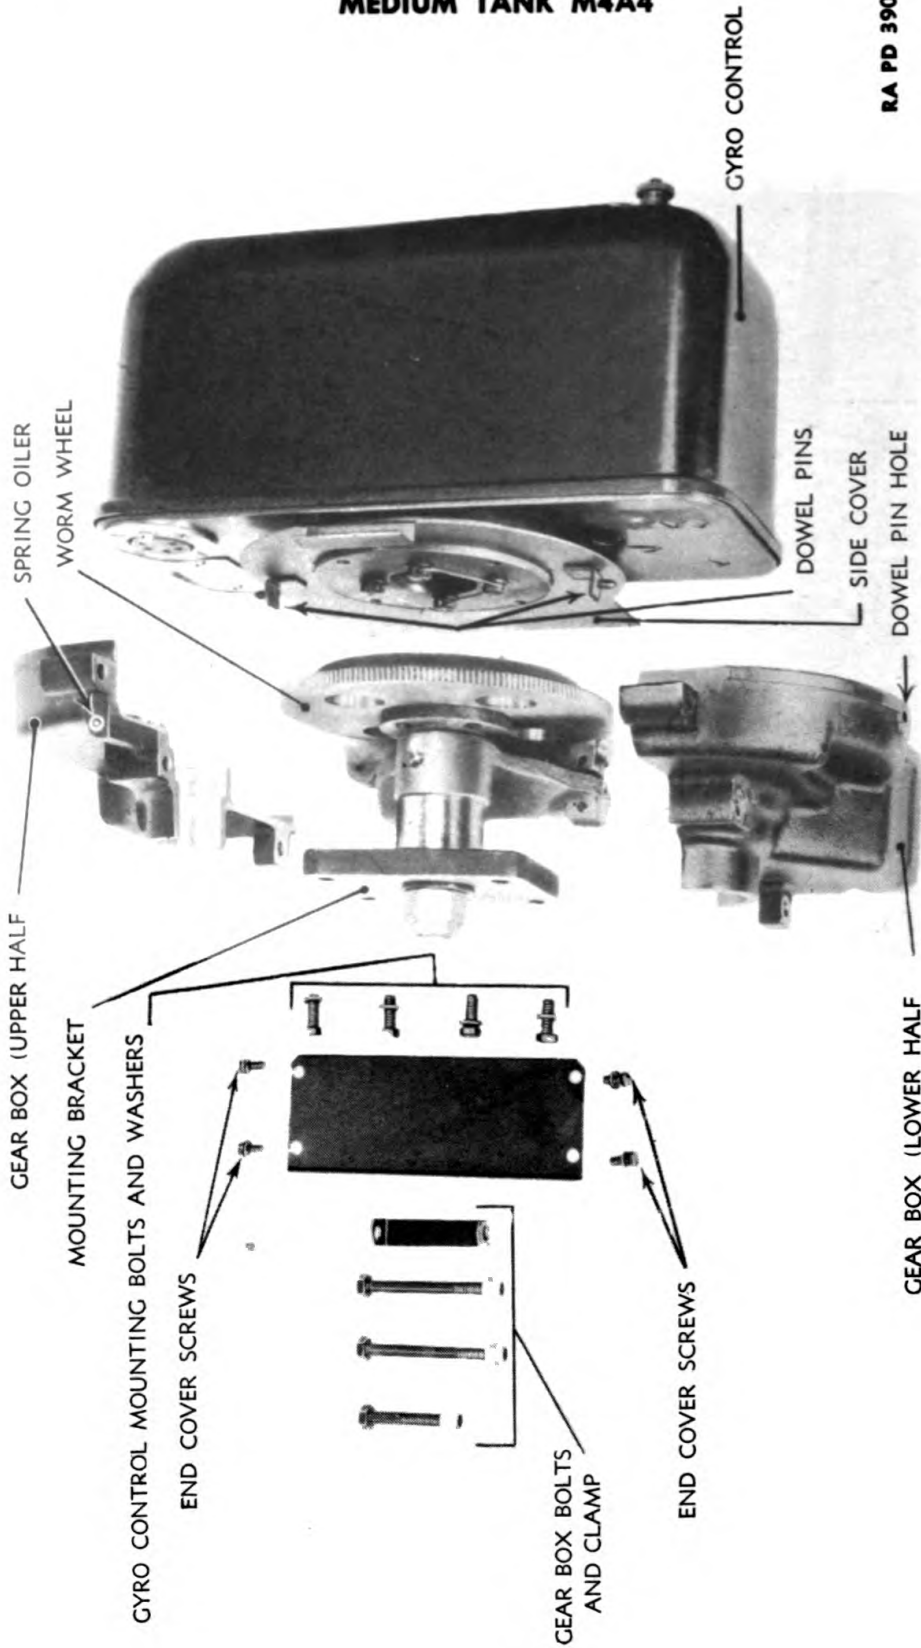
Gyro Stabilizer Control Gear Box Disassembled
